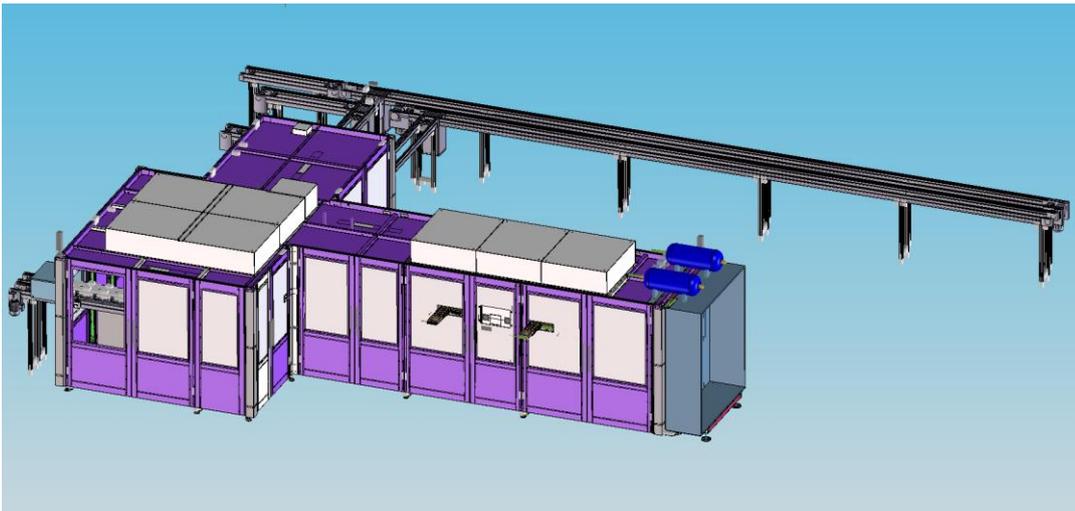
Tab Trimming and Welding, MANZ AG Manz.com
